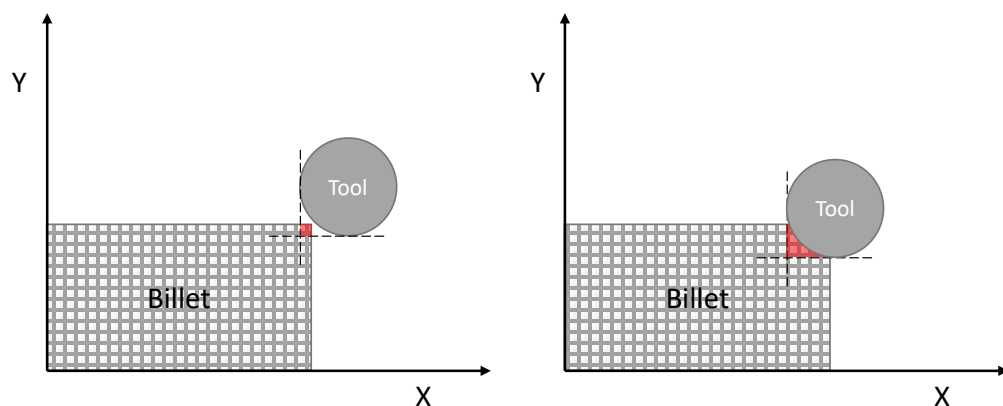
Process top view. Left: Non-machining cutting tool element. Right machining cutting tool element.
